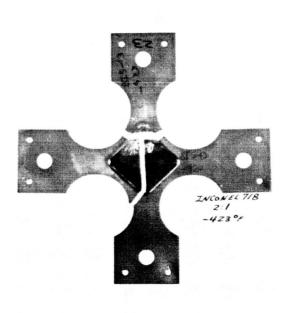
FAILED 2:1 BIAXIAL TEST SPECIMENS (UNWELDED CONDITION)
